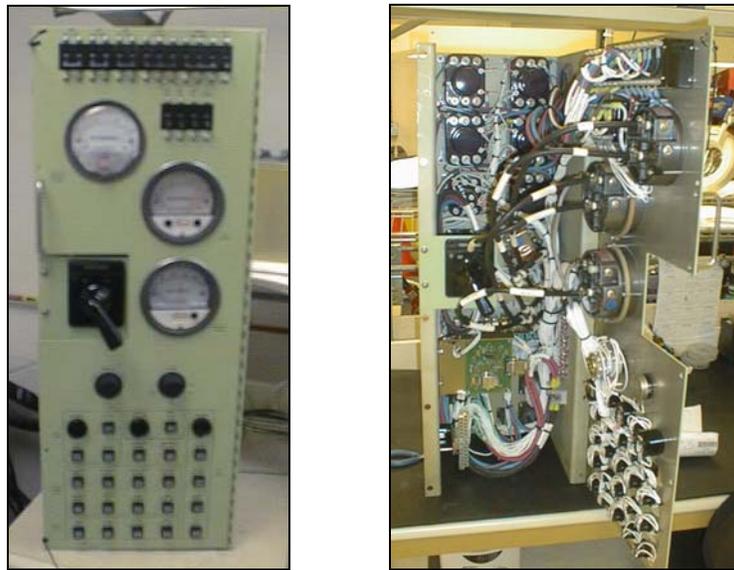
Photos showing the exterior (left) and the interior (right) of the control panel assembly.
